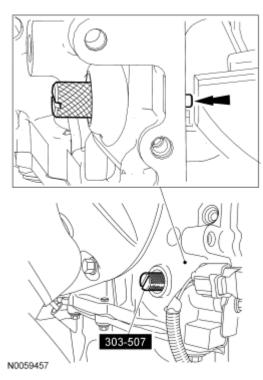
Locating Engine Plug Bolt Courtesy of FORD MOTOR CO.
